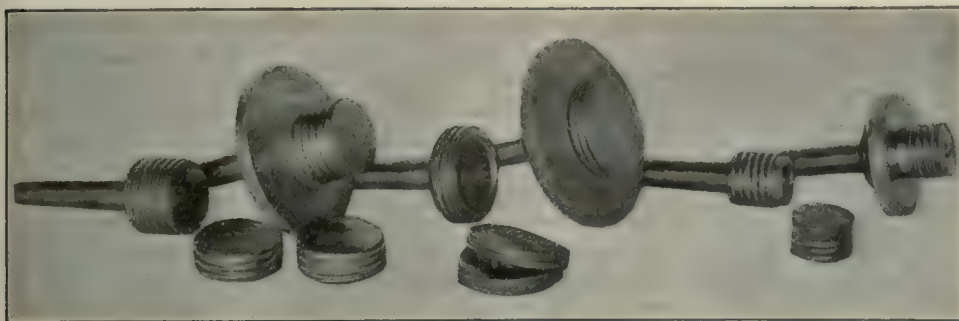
THREADING ROLLS AND SAMPLES OF WORK
